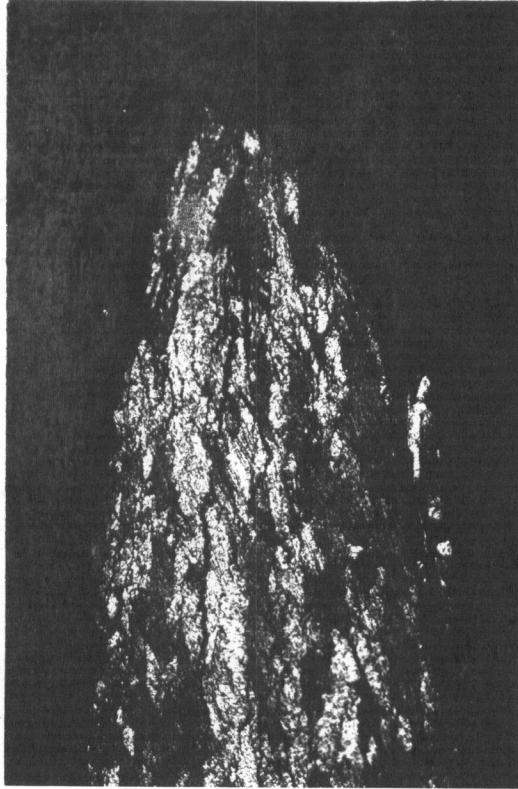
2800 F Base-metal Failure; X50; 0.050-in. Tungsten Weld
